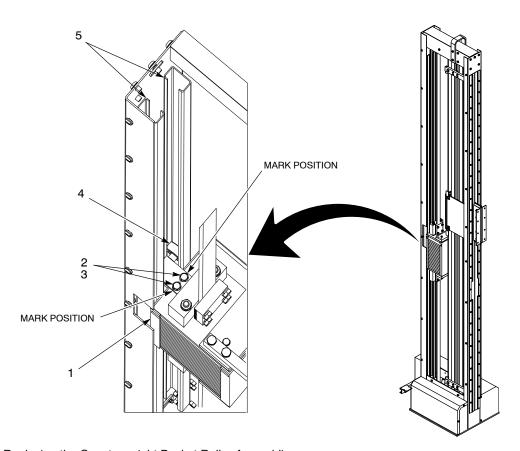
Replacing the Counterweight Basket Roller Assemblies
